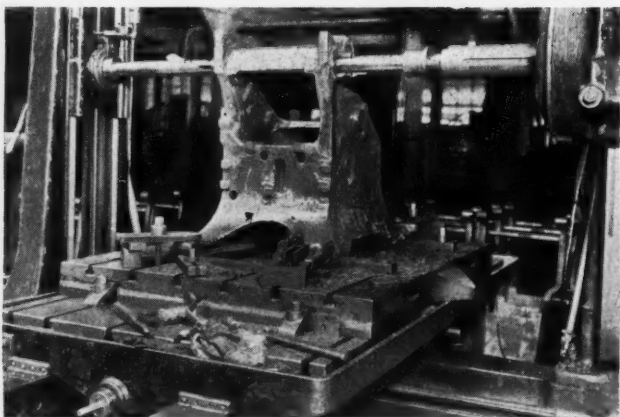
Boring machine for boring shaft holes in the Chandler & Price "Craftsman" Automatic Feeding Press.
